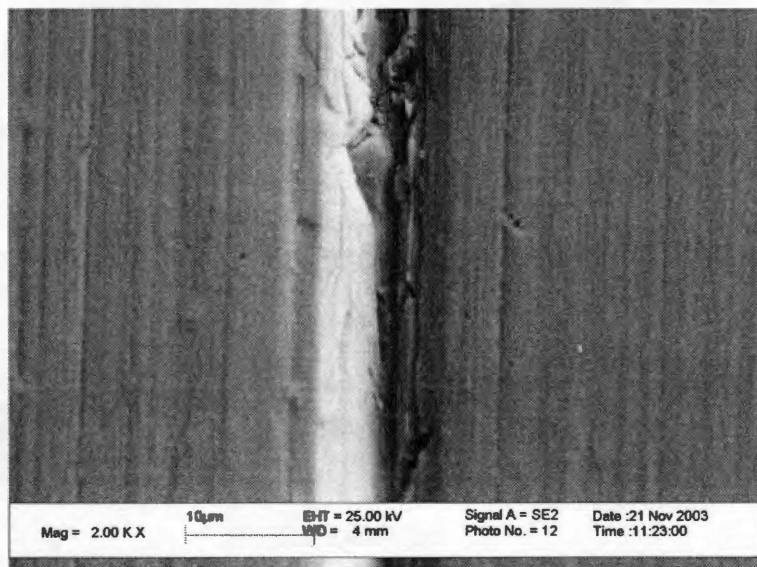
SE Image of Radial Machine Marks And a Large Geometric Defect on the Outside Surface of a Round Bar Fatigue Specimen.
